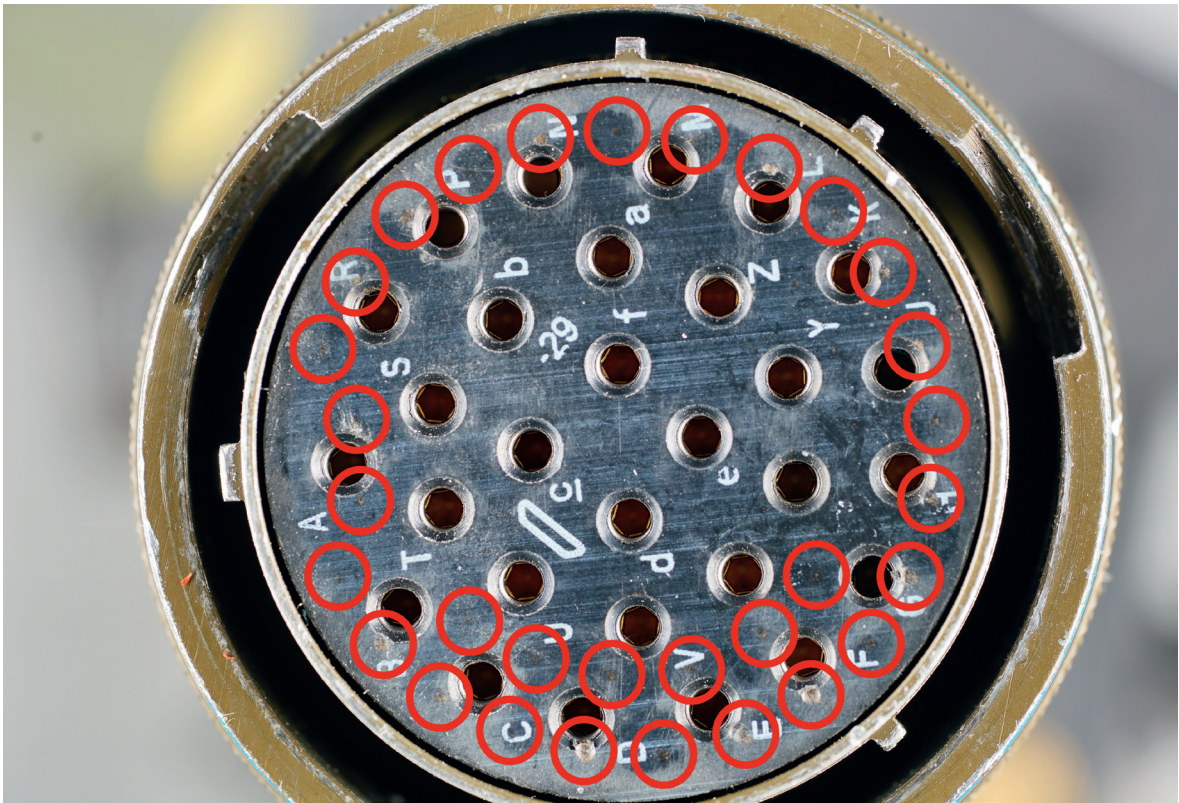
FADEC A socket pin marks on loom connector B. (Source: Technify Motors)
